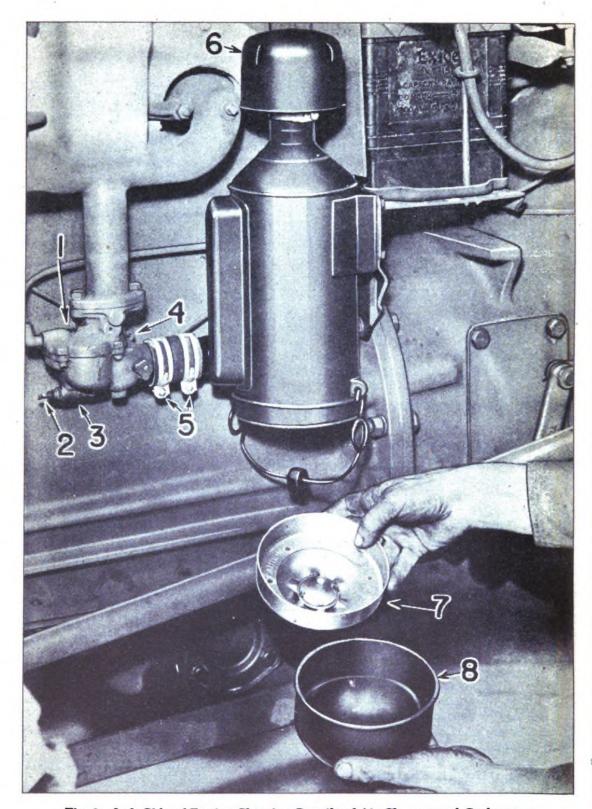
Left Side of Engine Showing Details of Air Cleaner and Carburetor
